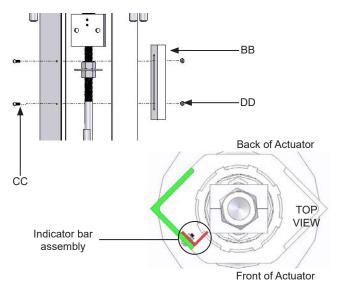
Indicator Bar Assembly (Cylinder and Spring Cartridge hidden for clarity)
